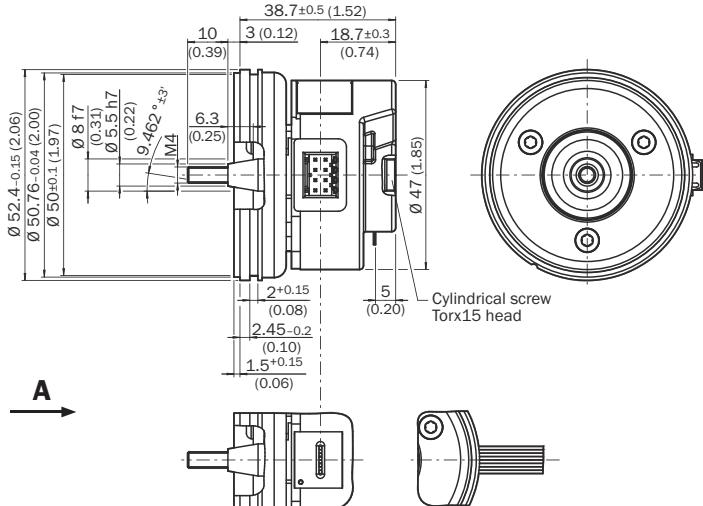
Dimensional drawing of SRS50S/SRM50S, conical shaft, resolver support
